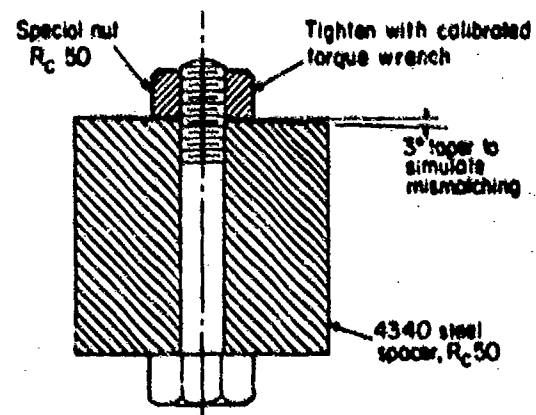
Simple fixture for sustained-load torque tests on steel bolts.
